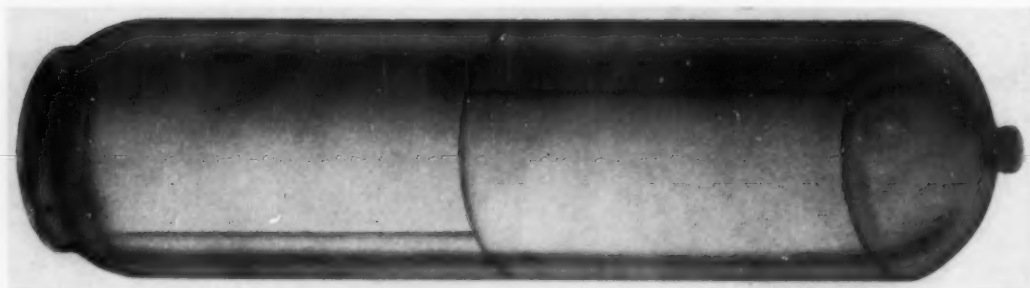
Solid Fuel Container With Maximum Amount of Welding. This type is
